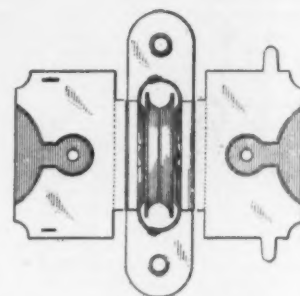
Housing and attaching flange for sash pulleys, designed by W. F. Krueger
